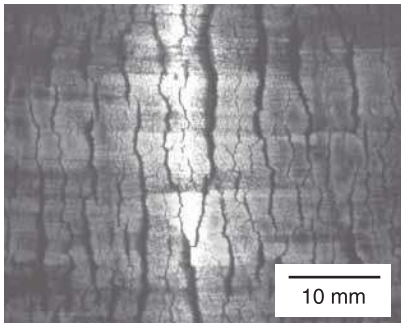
Brake drum surface showing a high level of heat checking. Source: Courtesy Webb Wheel Products, Inc.
